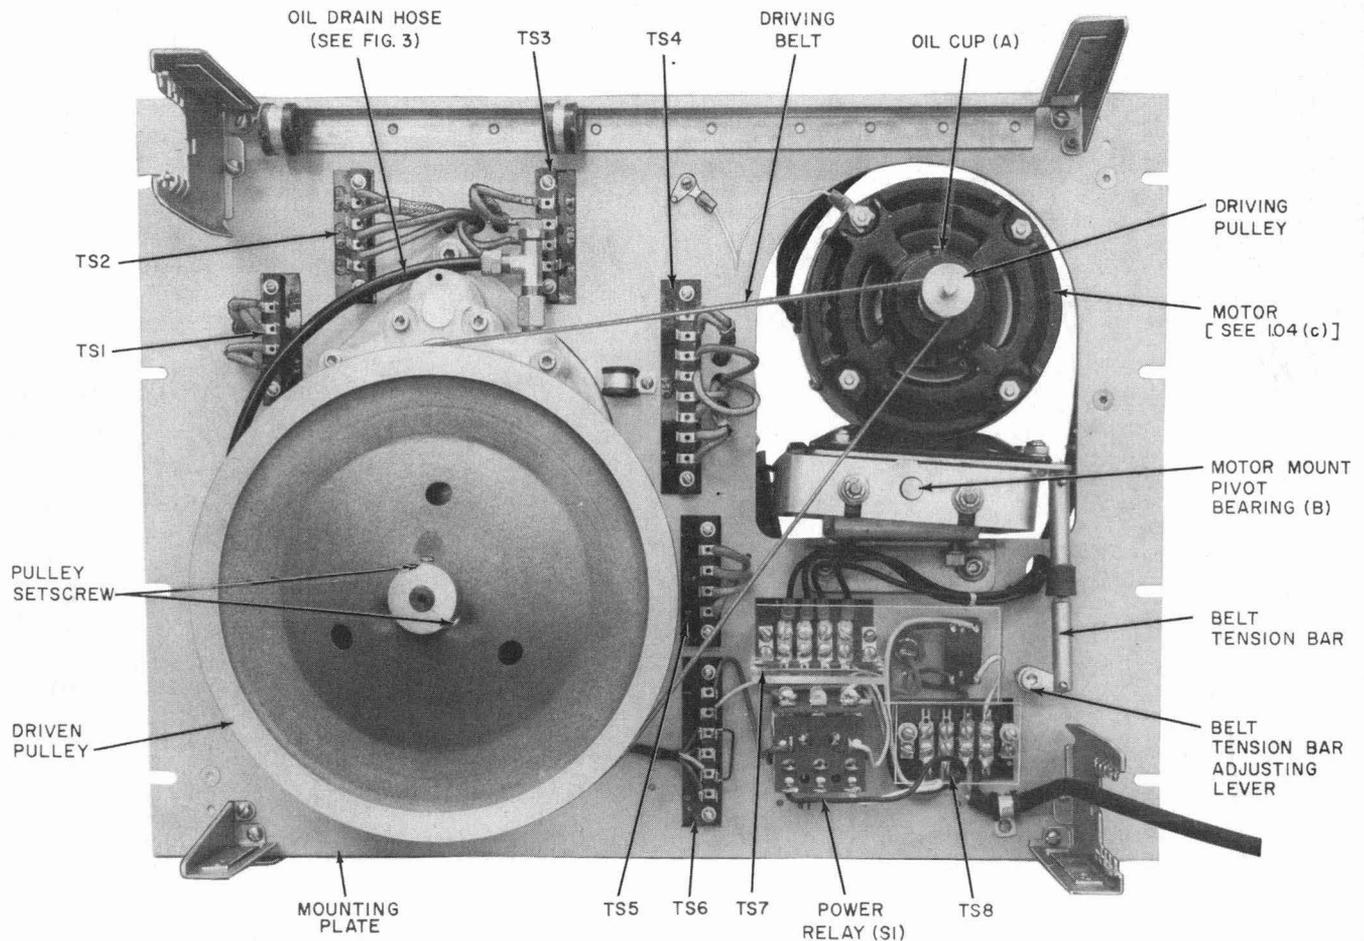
KS-12068 Recorder-Reproducer—Rear View with Cover Removed—L6 Machine Shown
